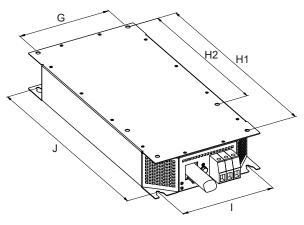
Mounting dimensions of line reactor, frame sizes FSD and FSE
